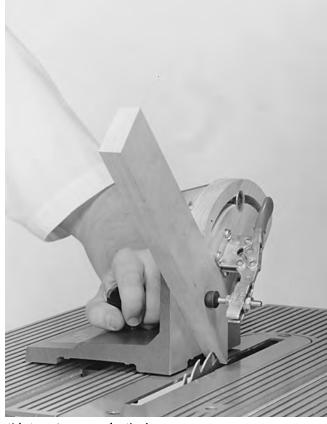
The mating pieces are set and clamped in position like this to cut grooves for the keys.
